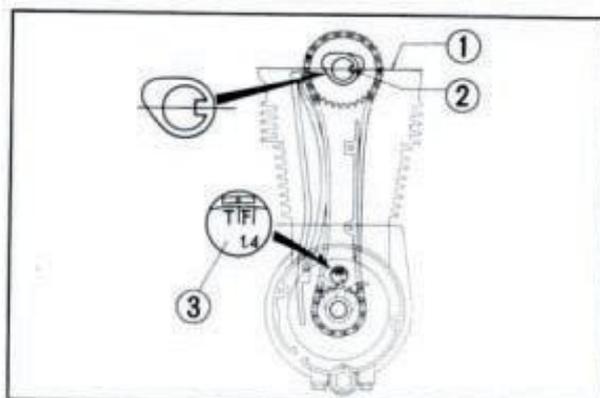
① Cylinder head flange surface ② Cutout notch ③ Spark advancer
